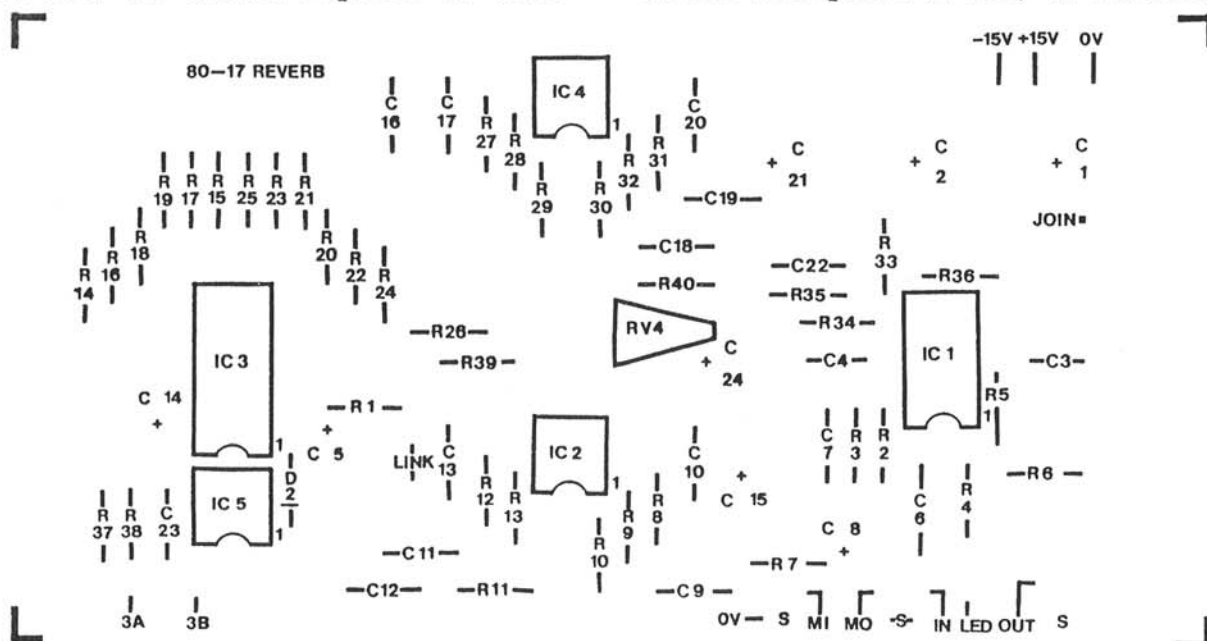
COMPONENT OVERLAY FOR 80-17 PCB
